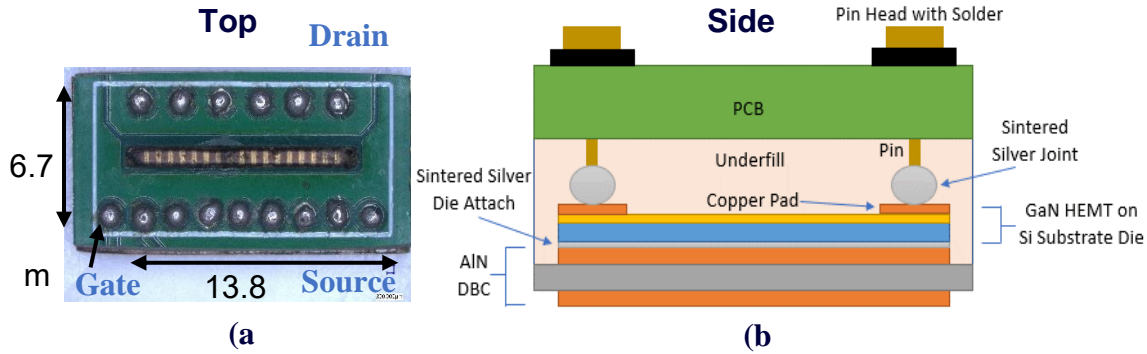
(a) Top and (b) side views of the PCB-Interposer-on-DBC design. Heat extraction is through the bottom DBC, while the nickel pins are used as lateral interconnects. While the prototype used PCB pads for external bonding, the pin heads themselves are intended to be the point of external connection and are shown in (a) [18], [19].
